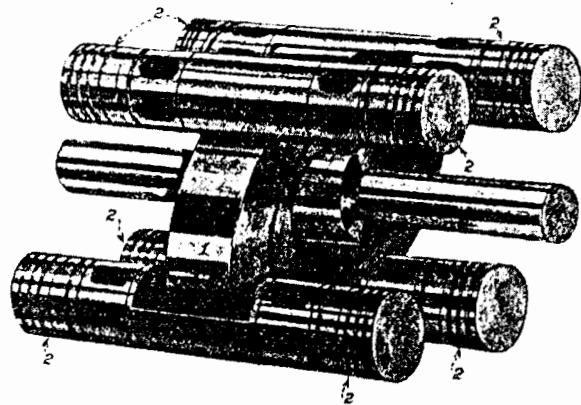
ESSENTIAL MOVING PARTS OF A CRANKLESS ENGINE HAVING THE SAME NUMBER OF PISTONS AS THE ENGINE SHOWN IN FIG. 1
